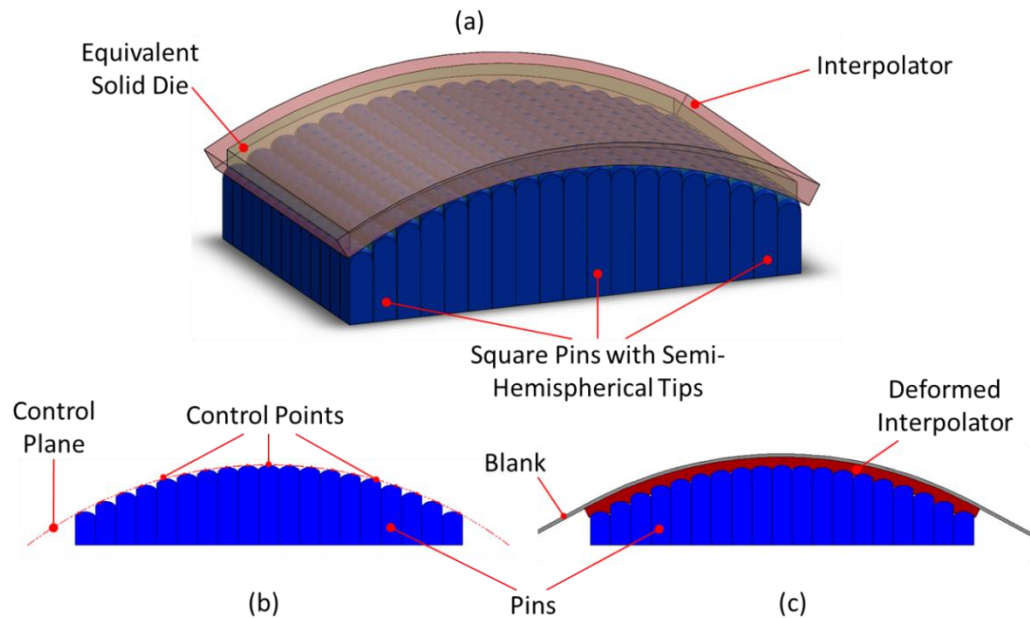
Reconfigurable tooling comprised of a bed of pins
